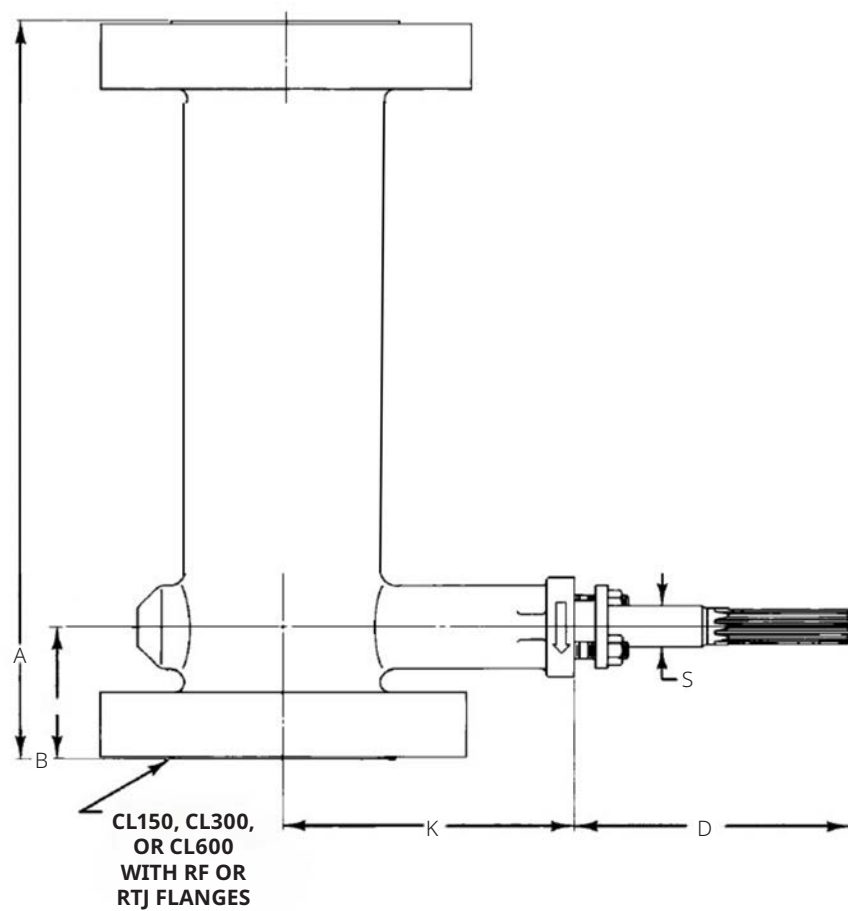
Fisher V500 Rotary Control Valve Flanged Dimensions (Refer to Table 12)
